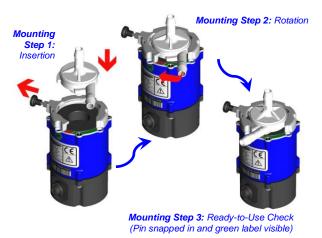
Intuitive 3-step pump head mounting procedure with bayonet type socket
